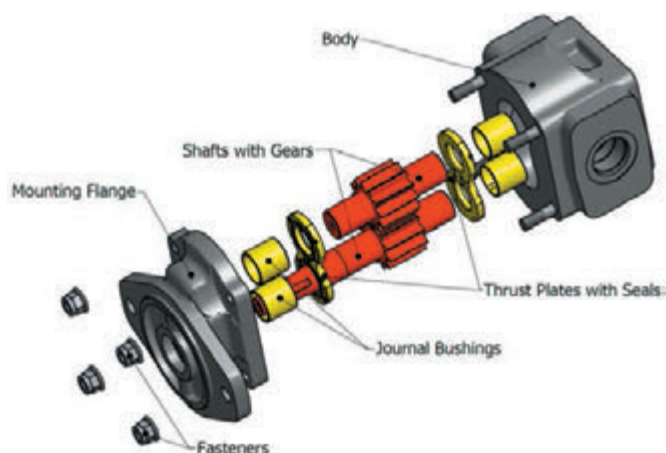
Three-dimensional CAD model – Parker PGP 600 Series. Exploded view
